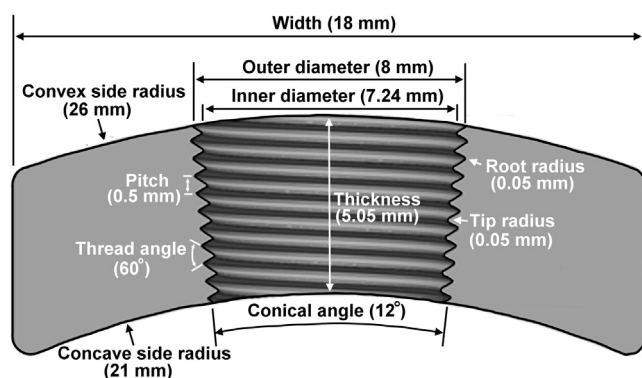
Basic plate and threaded screw-hole geometries and dimensions.
